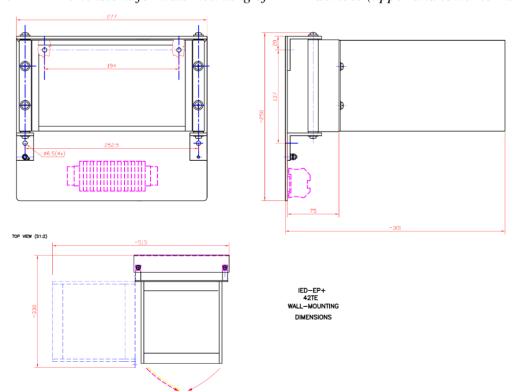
Dimensions for wall mounting of 42 HP devices (lower terminal only)
